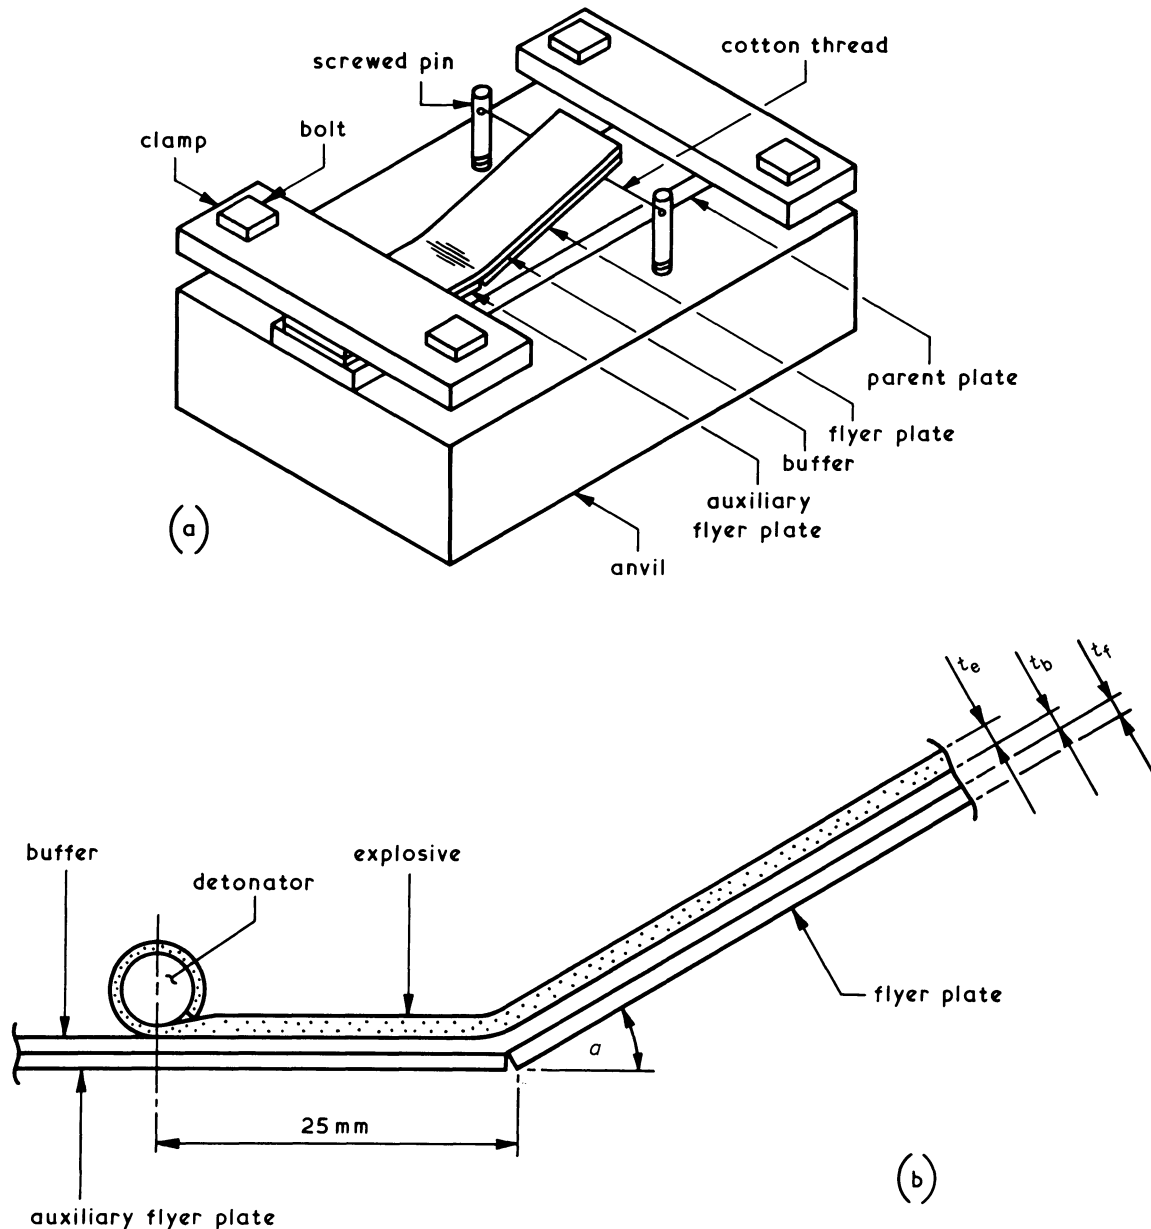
(a) Inclined flyer plate arrangement. (b) Details of flyer plate/rubber buffer/explosive combination.
